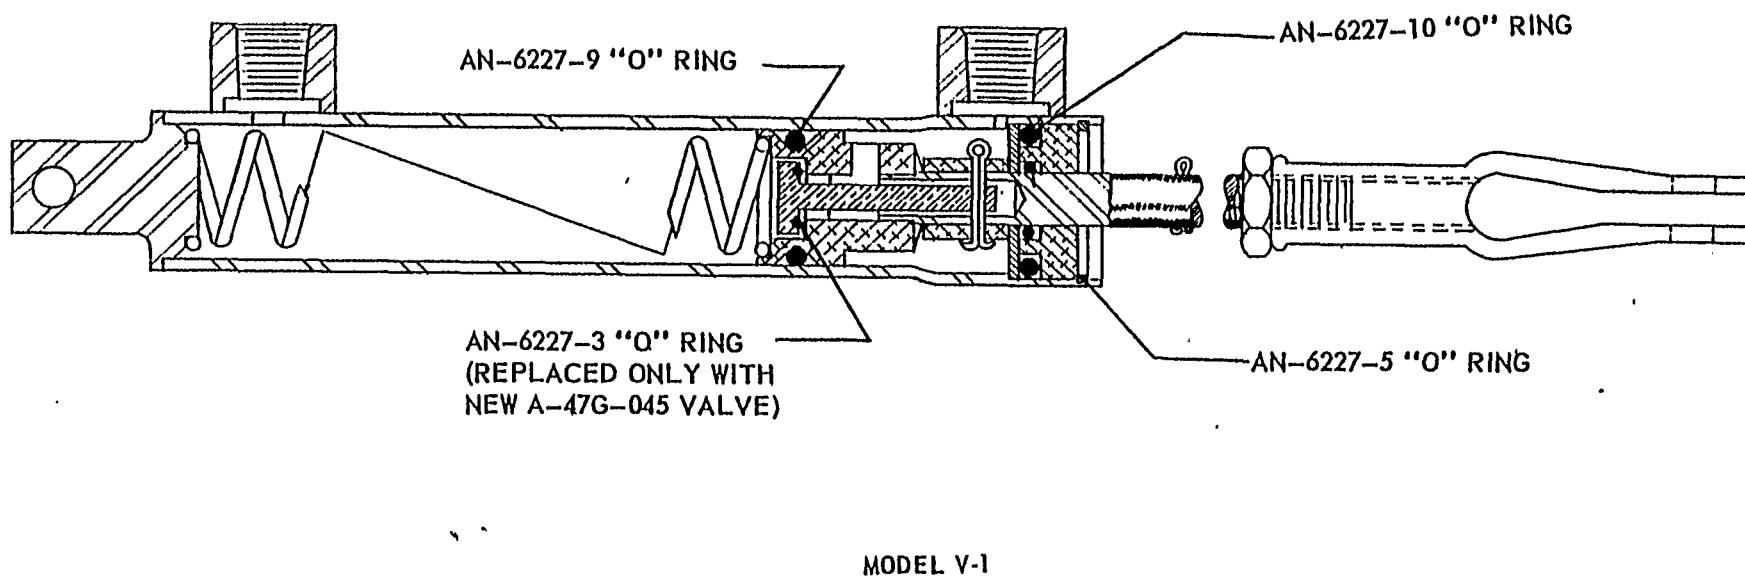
PARKING BRAKE VALVE ASSEMBLY
